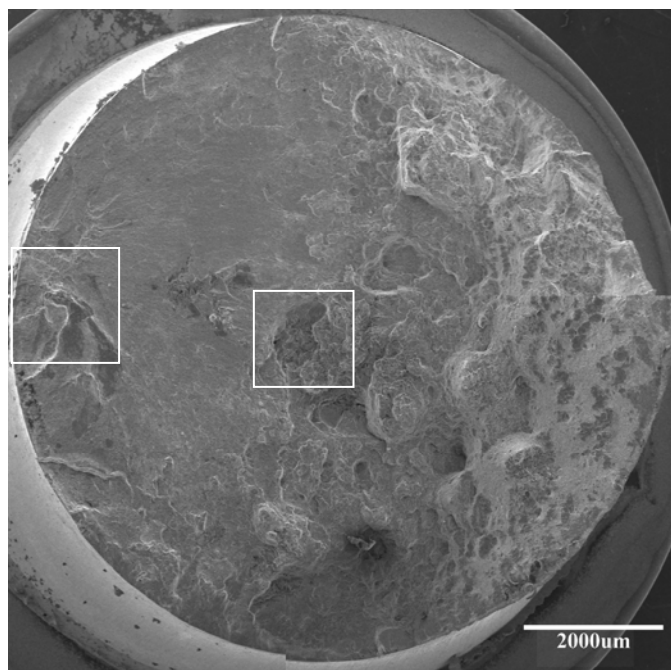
Macroscopic View of a Cylinder with Disc Specimen Fracture Surface, $S_a = 392$ MPa (Specimen E5)
